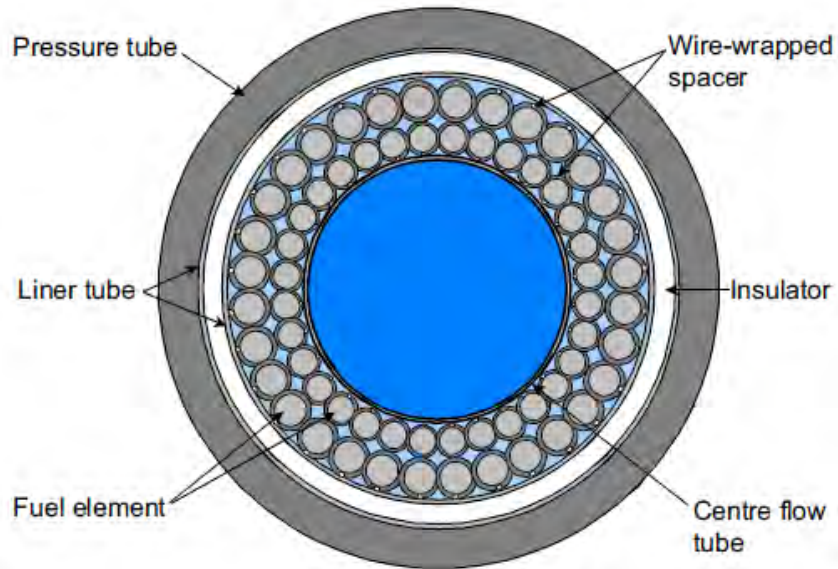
A 64-element fuel assembly cross-sectional view inside of the of a PT-type concept
